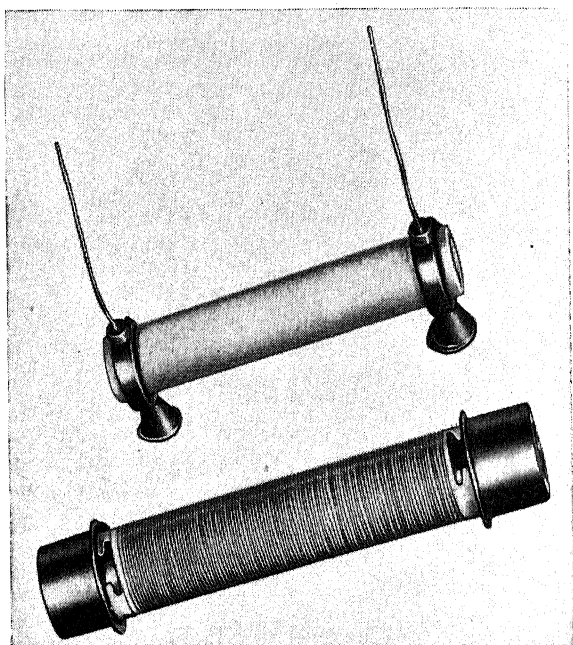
Resistor terminal constructions. The upper unit is an unfinished wire-wound resistor with die-cast terminals. The winding had been removed before the photograph was taken, leaving a short end of wire visible only in the original print. The conical gates would be clipped off in production, leaving only the radial wire leads protruding through the insulating coating of the finished resistor. The lower unit is an RW-12 minus its protecting glass sleeve.
